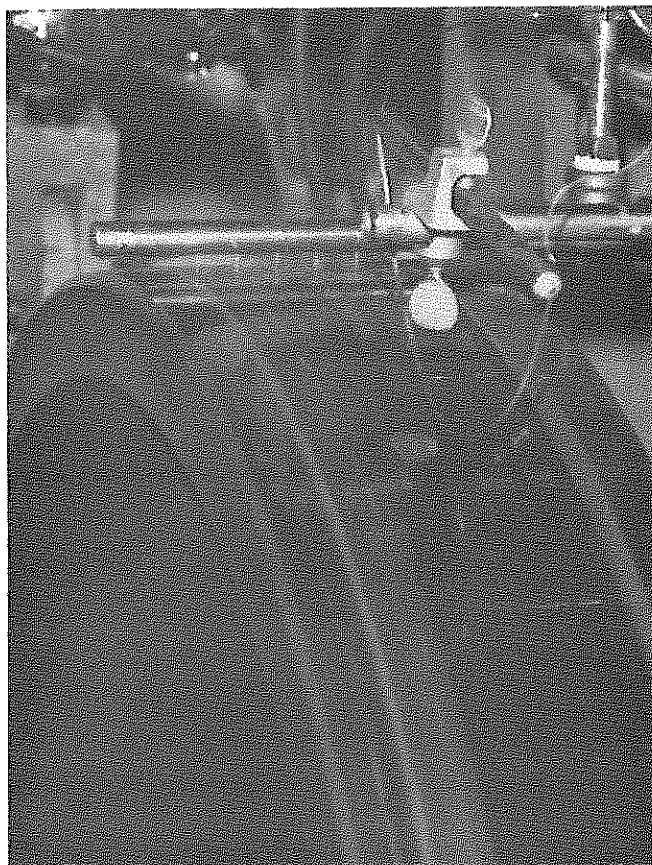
HEAT STREAKS ON WHEEL SURFACE
